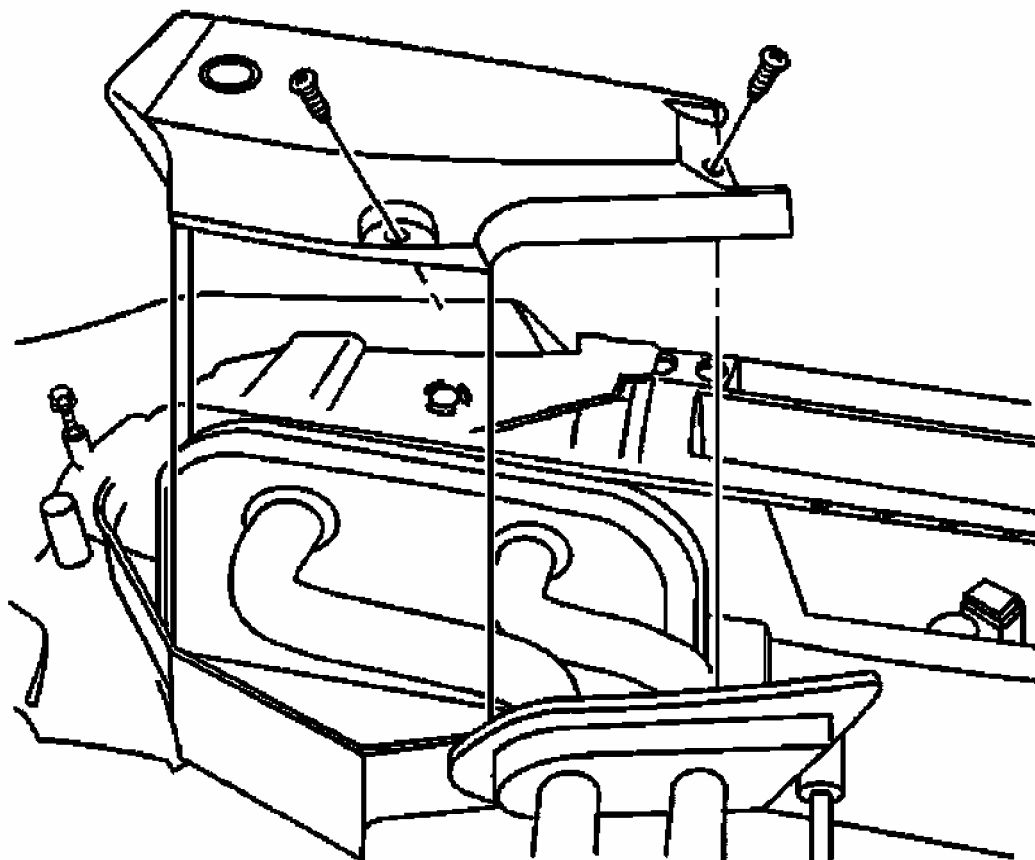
Evaporator & Blower Motor Assembly Mounting
